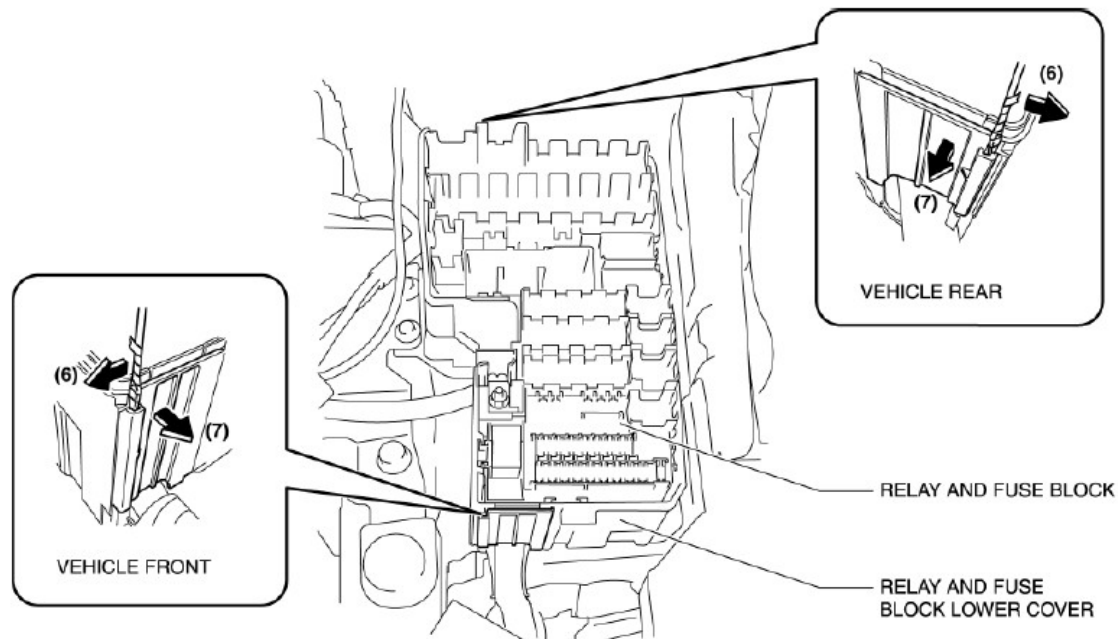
Identifying Relay And Fuse Block Lower Cover And Wiring Harness Tape Securing Front Wiring Harness
